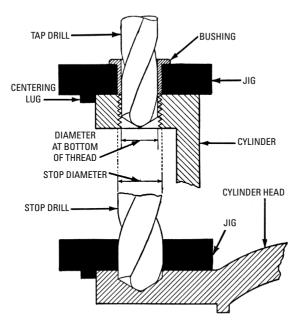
A clamp jig, with the tap drill guided by a bushing, designed for drilling holes in the cylinder (top); the operation for a hole for the cylinder head (bottom).
